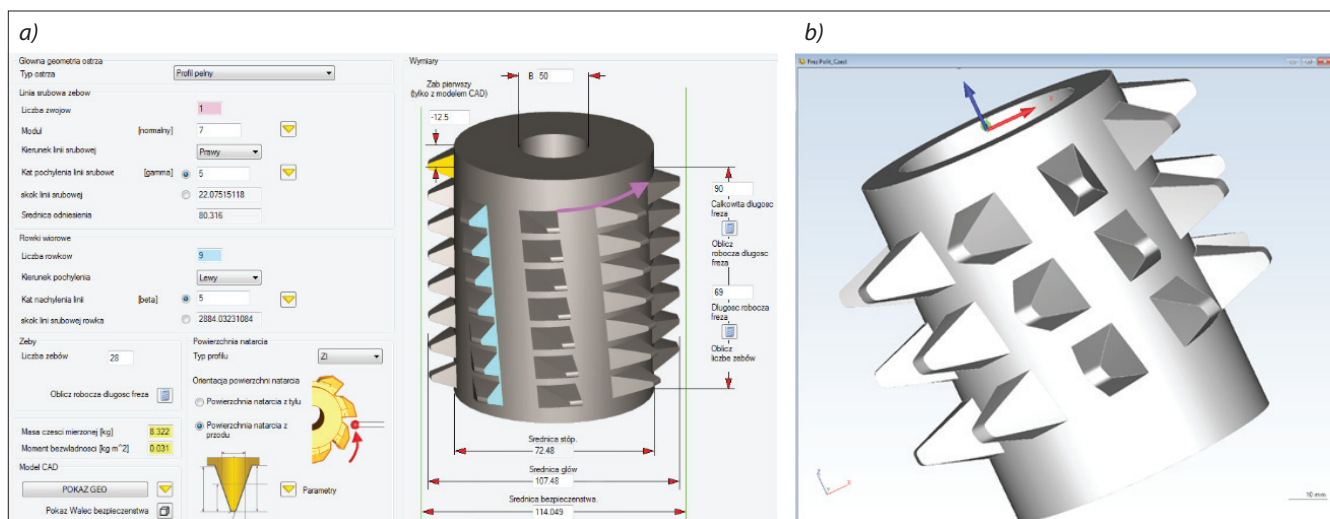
Zeiss GearPro HOB – entering cutter parameters (a), generated model of hob cutter (b)
